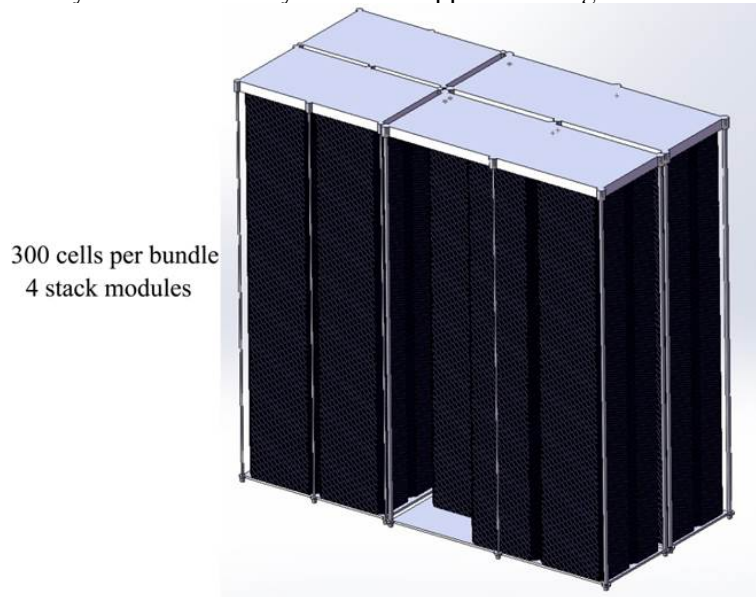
Fuel Cell Assembly to be used in long-haul locomotive
